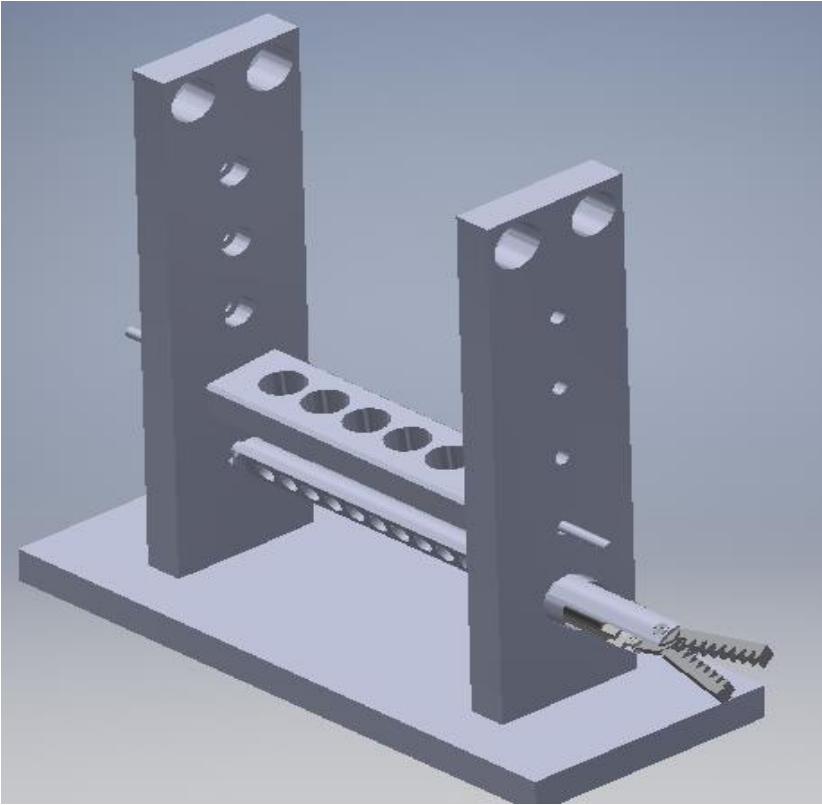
In-silico Design of the Testing Rig and the Assembled Device
